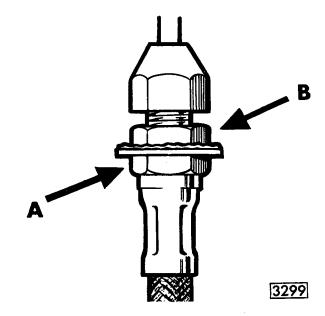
Flexible hose connection. Hold hexagon "A" with a spanner when removing or refitting locknut "B"
